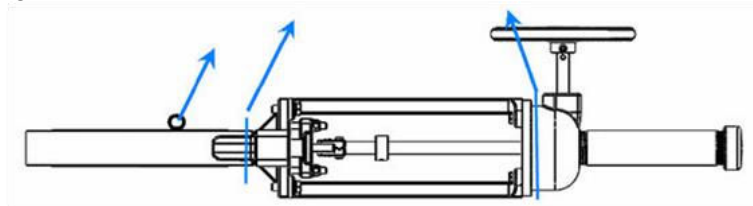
Knife Gate Valve with Bevel Gear Actuator, Horizontal Lifting
